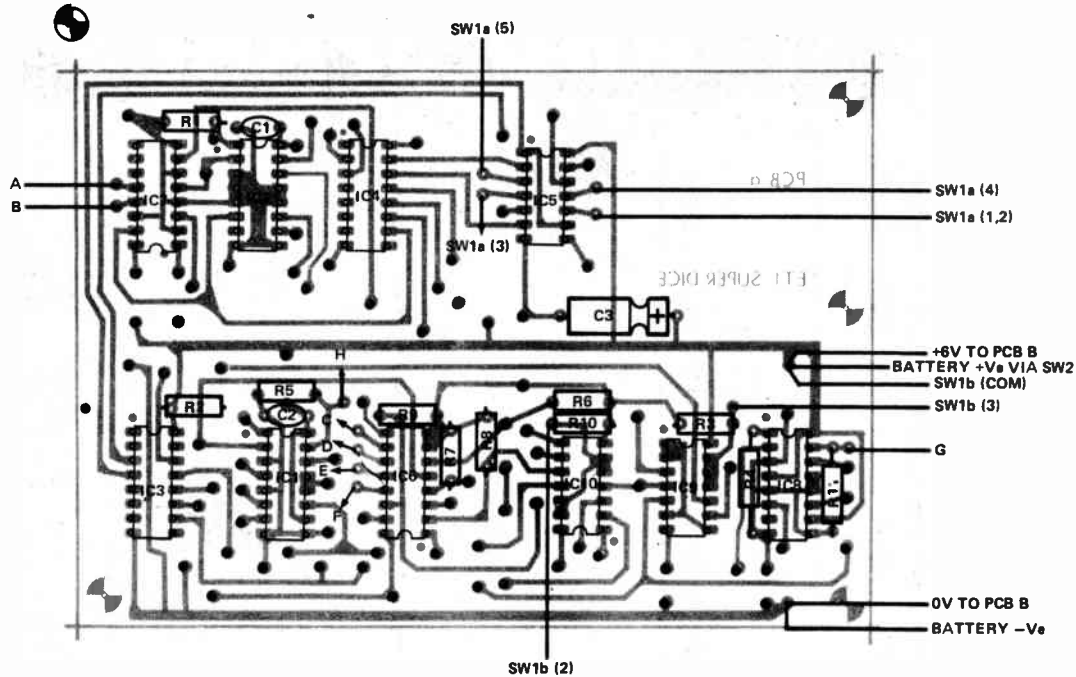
(Above) Component overlay for PCB A of the Superdice. This is the double-sided board, although only the 'non-component side' tracks are shown. The right-hand side of R2 isn't floating, it solders to the topside track. The two sides of the board must be connected by Veropins (soldered both sides) where indicated by black dots.
